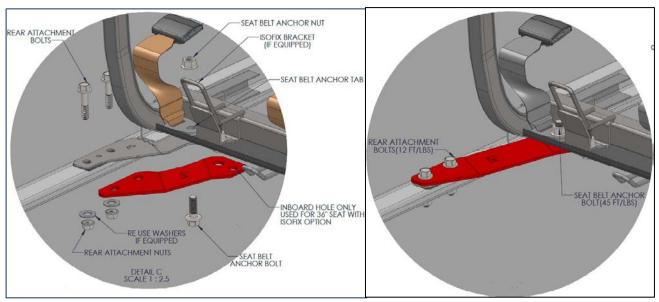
Bracket Installation (Driver's Side Shown) - 30 Inch and 32 Inch Seats
